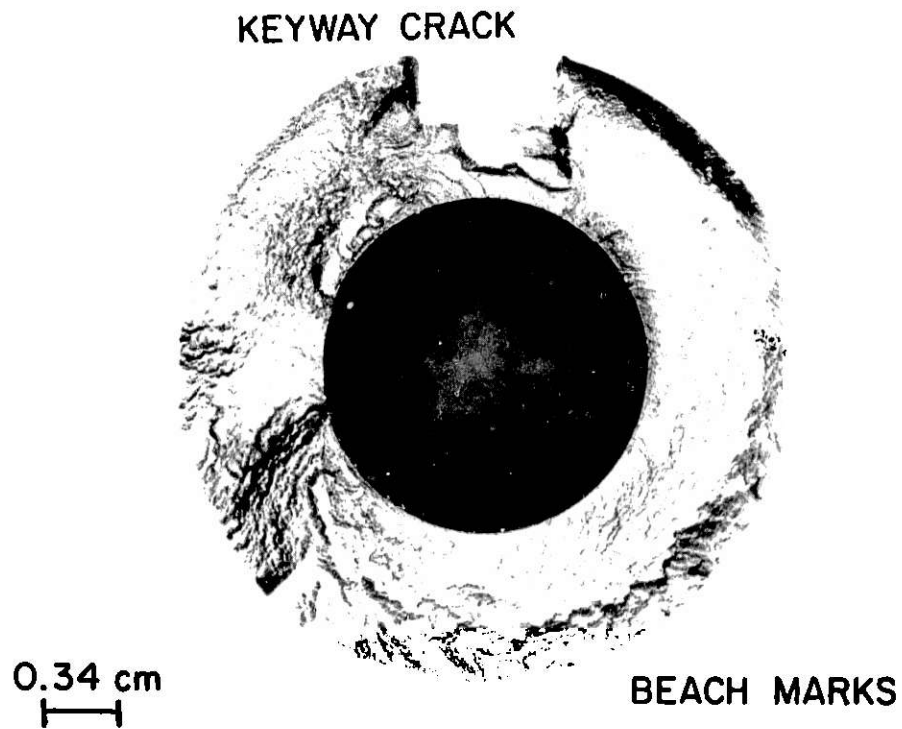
Cross Section of the Shaft Showing the Morphology of the Fractured Surface and Crack in the Keyway. ANL Neg. No. 306-78-44.
